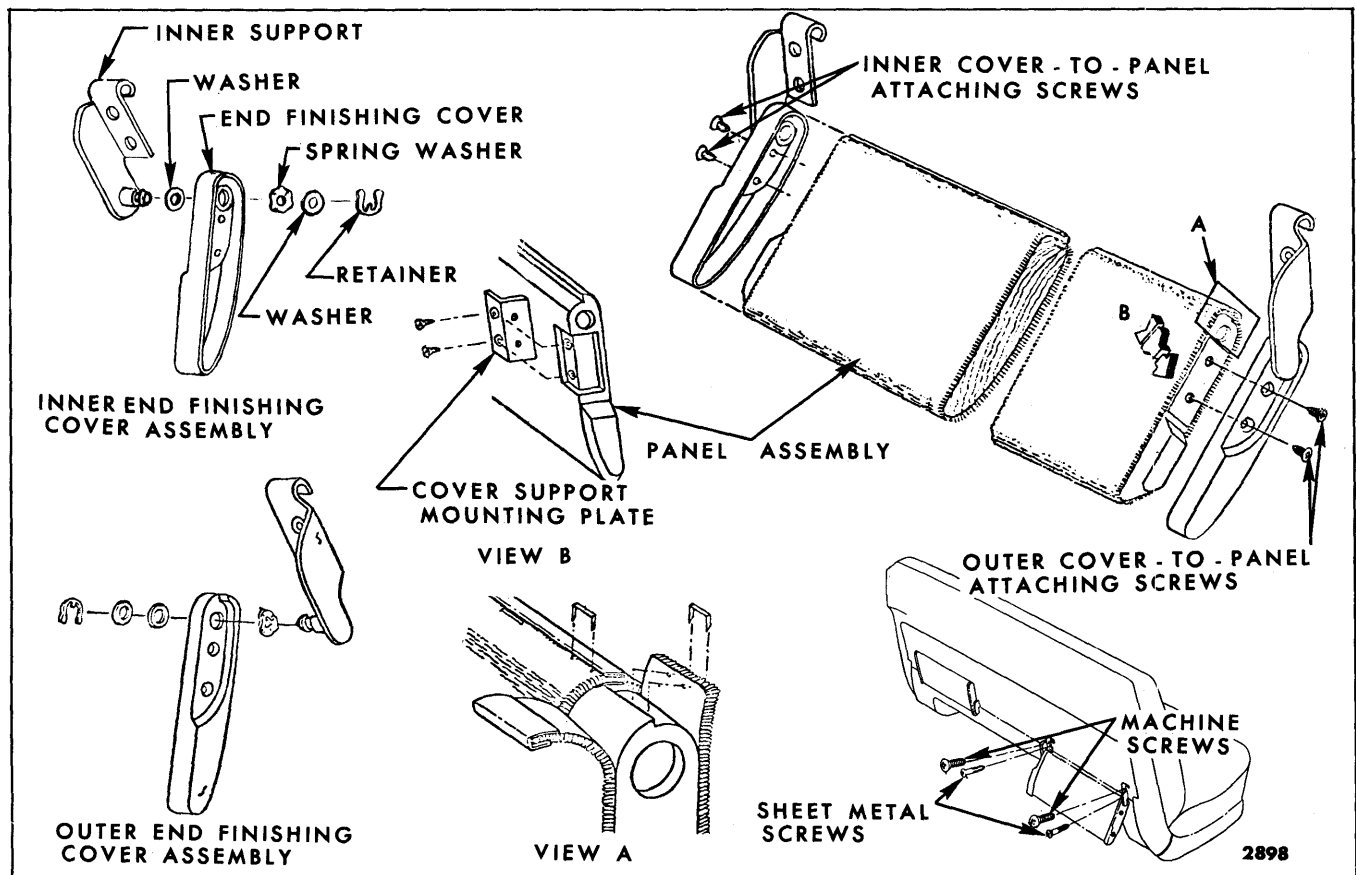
Foot Rest Assembly - Cadillac 68169 Style
